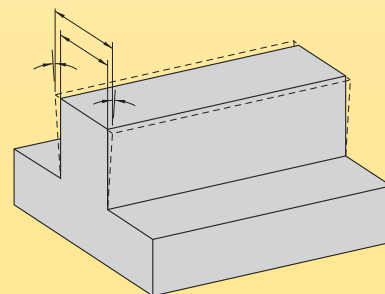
Flatness affects part tolerance more when milling both sides of a part.
